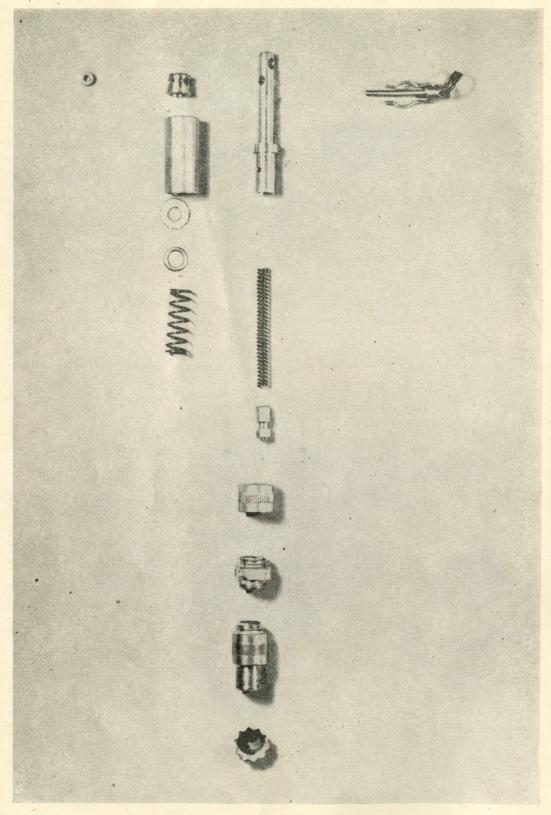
Figure II. Igniter, Pull and Tension Wire Type Z.u.Z.Z 35, Parts
